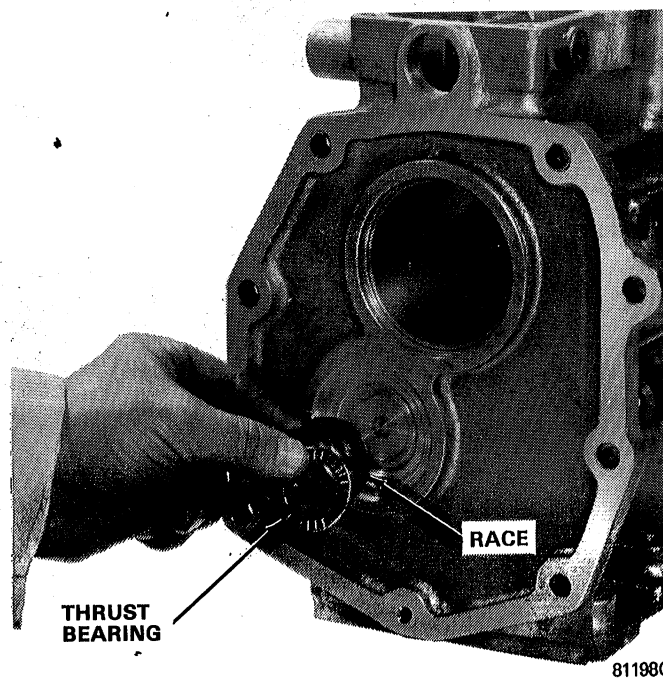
B-8 Countershaft Rear Thrust Bearing and Race Removal/Installation
